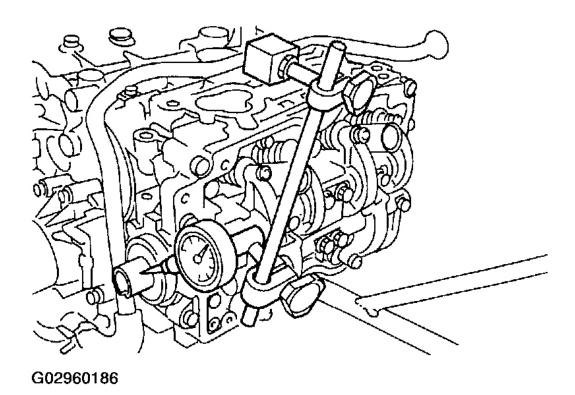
Measuring Thrust Clearance Of Camshaft With Dial Gauge Courtesy of SUBARU OF AMERICA, INC.
